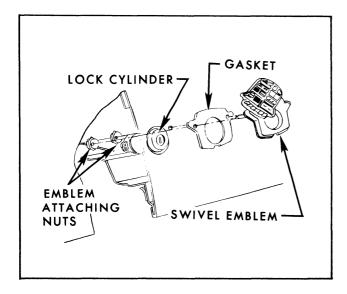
Typical Swivel Emblem - Stud and Nut Retained - Cadillac "C and E" Styles Shown
